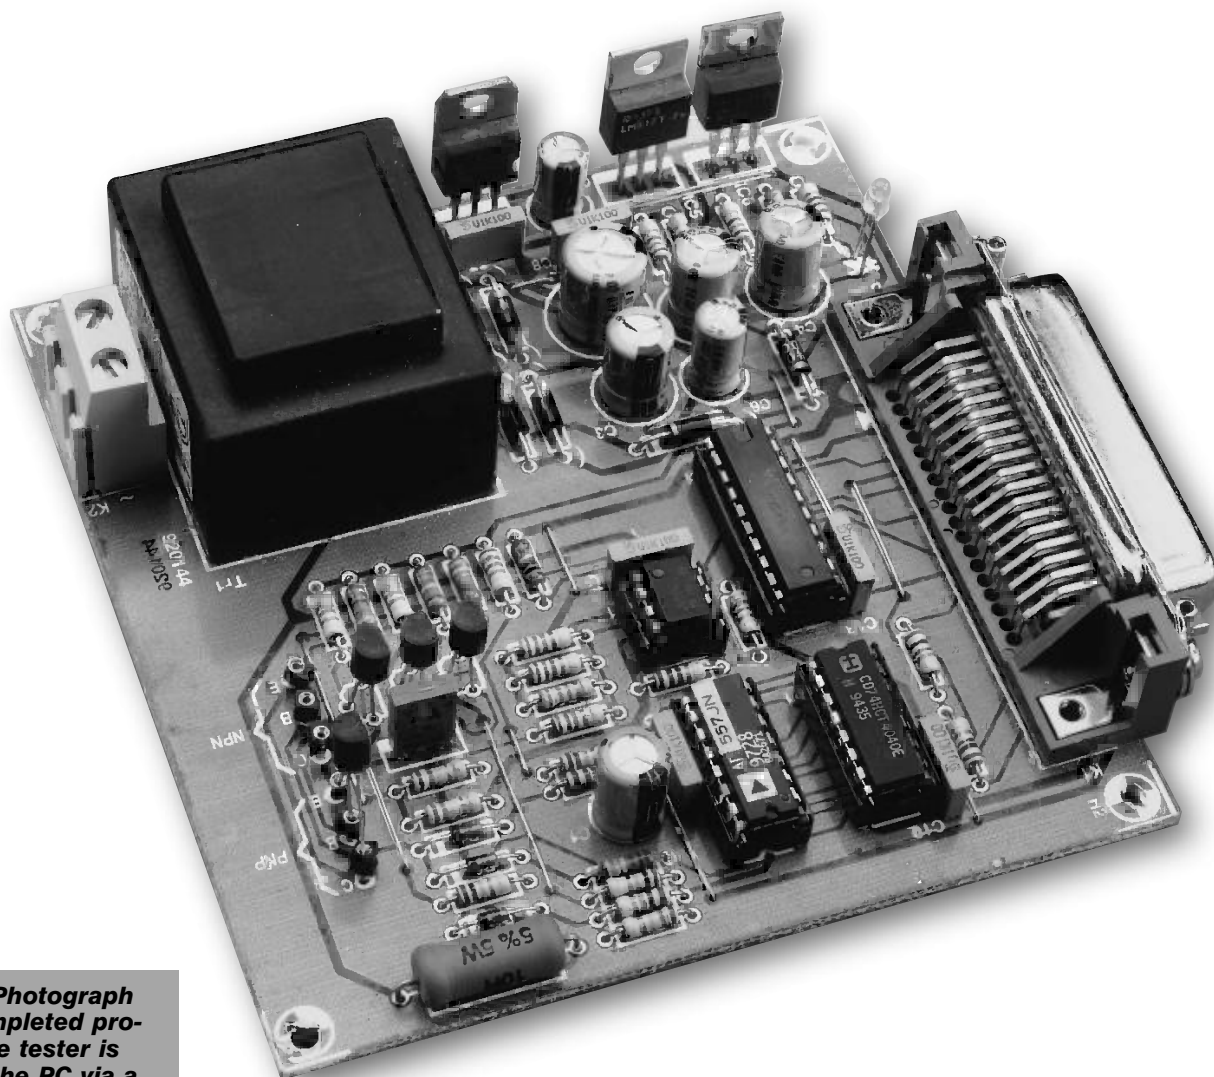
Photograph of the completed prototype. The tester is linked to the PC via a standard printer cable.
